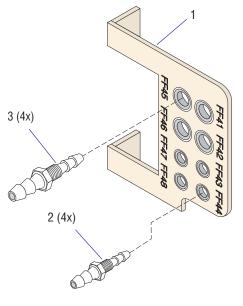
Bracket and Fittings - Upper Pneumatics Drawer (See Table 8.2-16)
